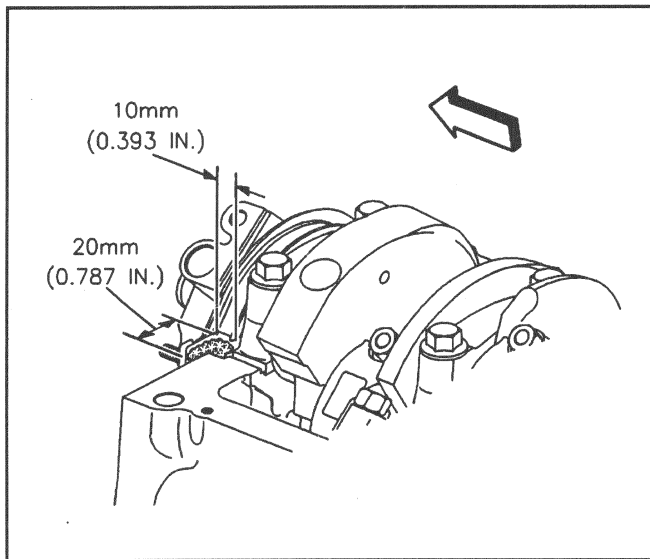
Applying Sealant to Front of Engine Oil Pan Surface
